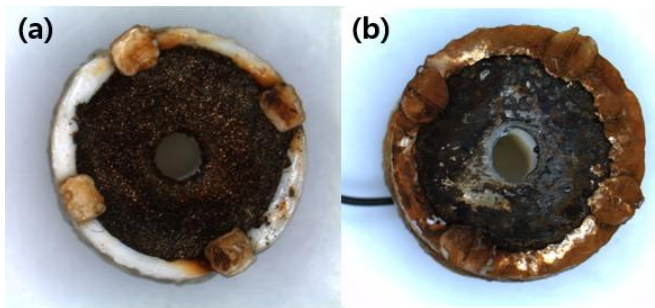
(a) SCC coated Cylindrical electrode tool condition and (b) Silver paste coated Cylindrical electrode tool condition after machining
